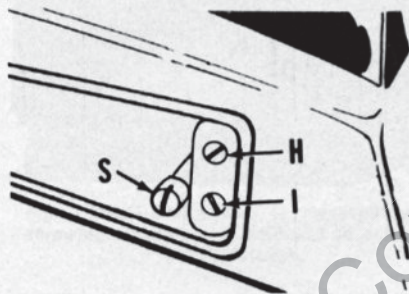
View showing location of carburetor high speed mixture screw (H), idle mixture screw (I) and idle speed screw (S).
